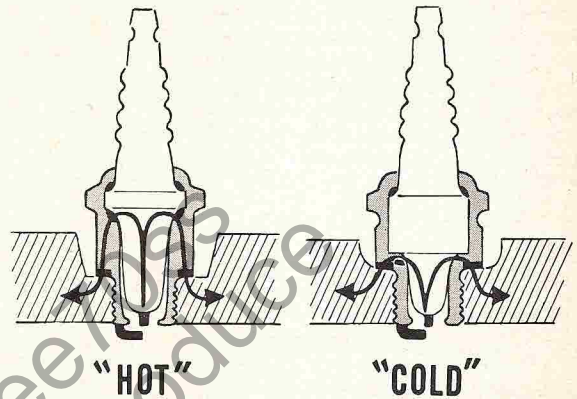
The two-cycle spark plug shown at left is almost exclusively used in chain saw engines.
